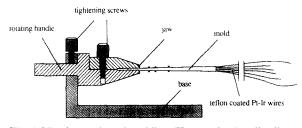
Vise for implant demolding. The rotating handle allows the implant to be rotated after small pieces of the mold have been pulled off one side.
